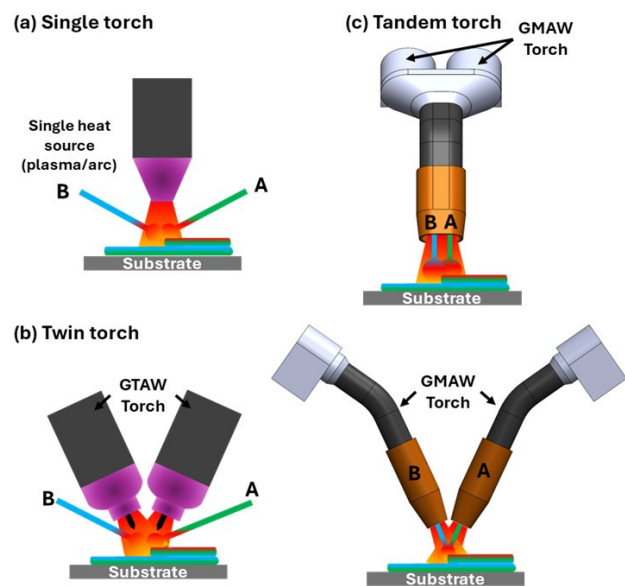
Arrangement of torches employed for FGM fabrication (a) Single torch, (b) Twin torch, (c) Tandem torch.
